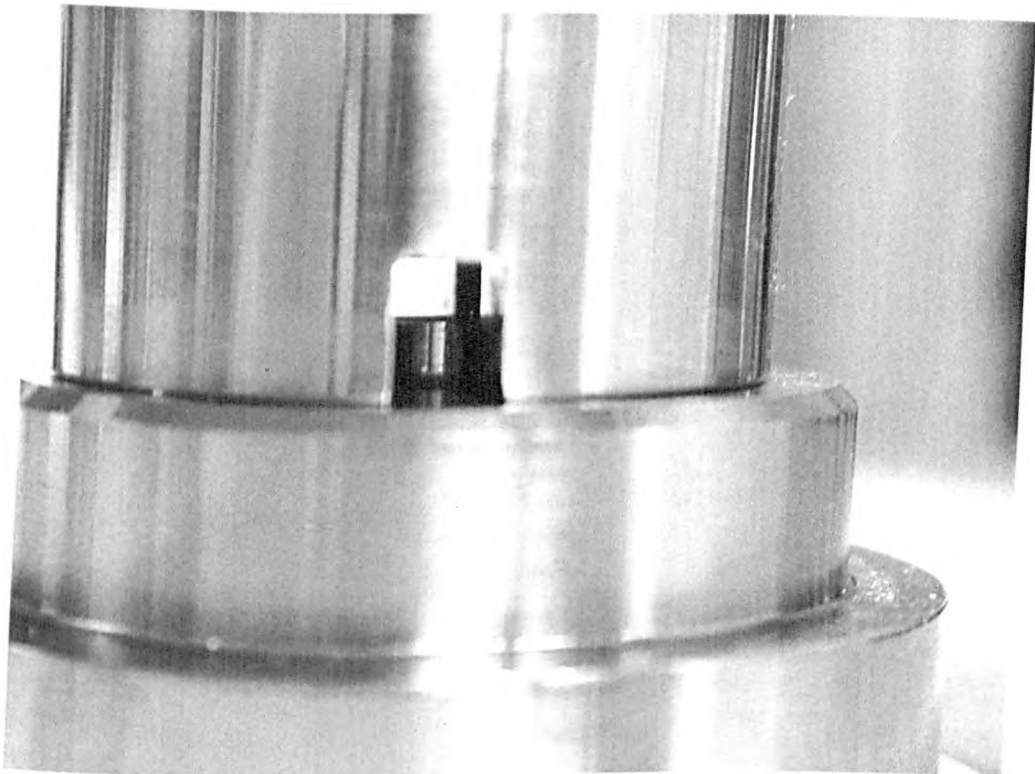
Closure of the hole due to wire erosion, with a manufactured pin.
